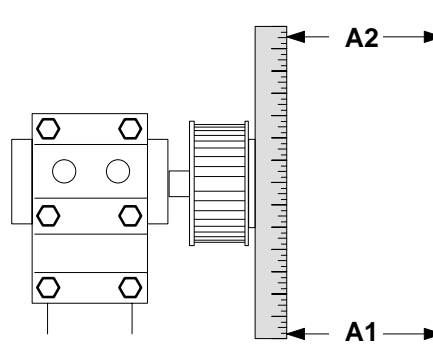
Gearmotor Pulley Replacement - Adjusting Position on Shaft
